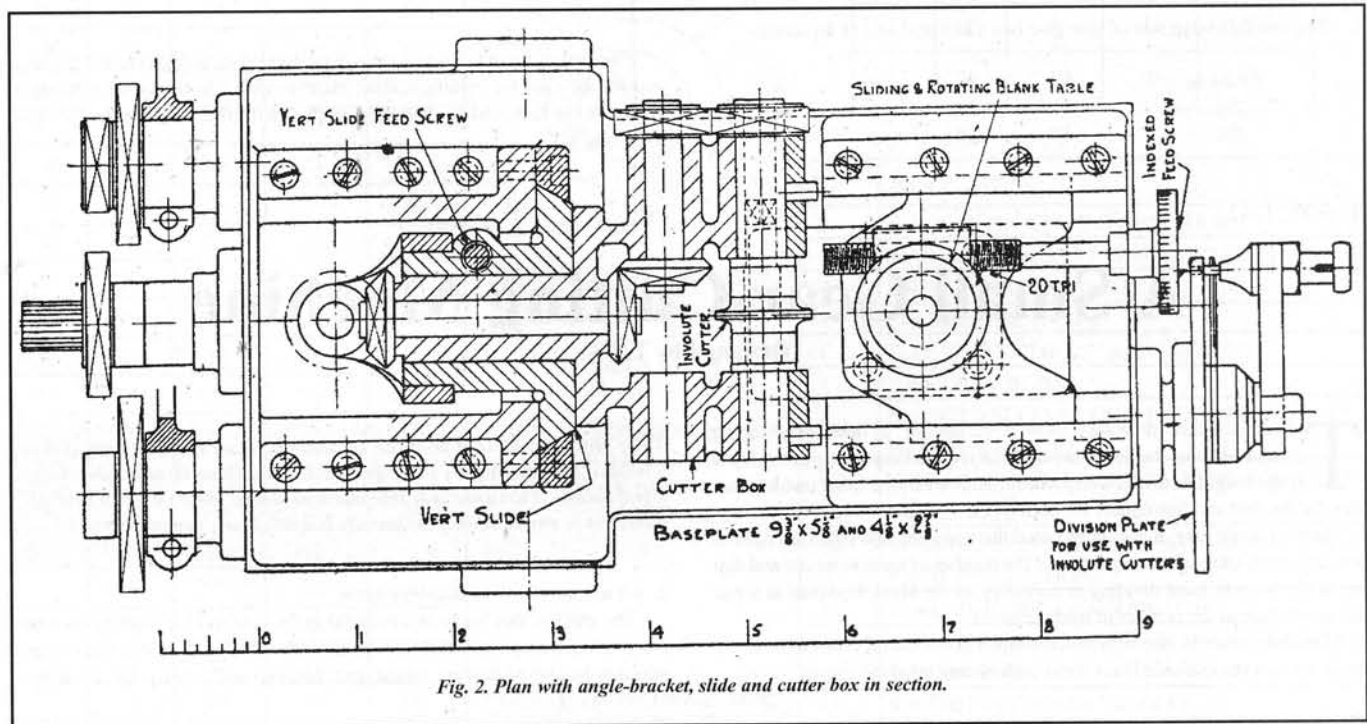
Plan with angle-bracket, slide and cutter box in section.
